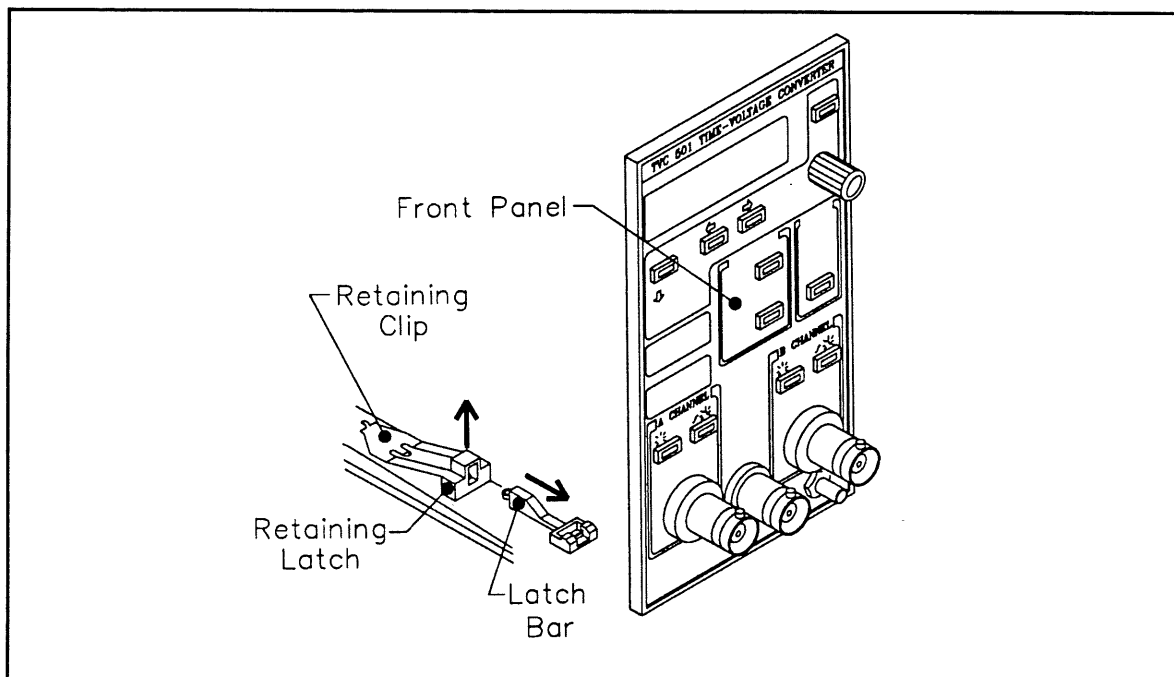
Removing the Latch Bar and Retaining Latch.
